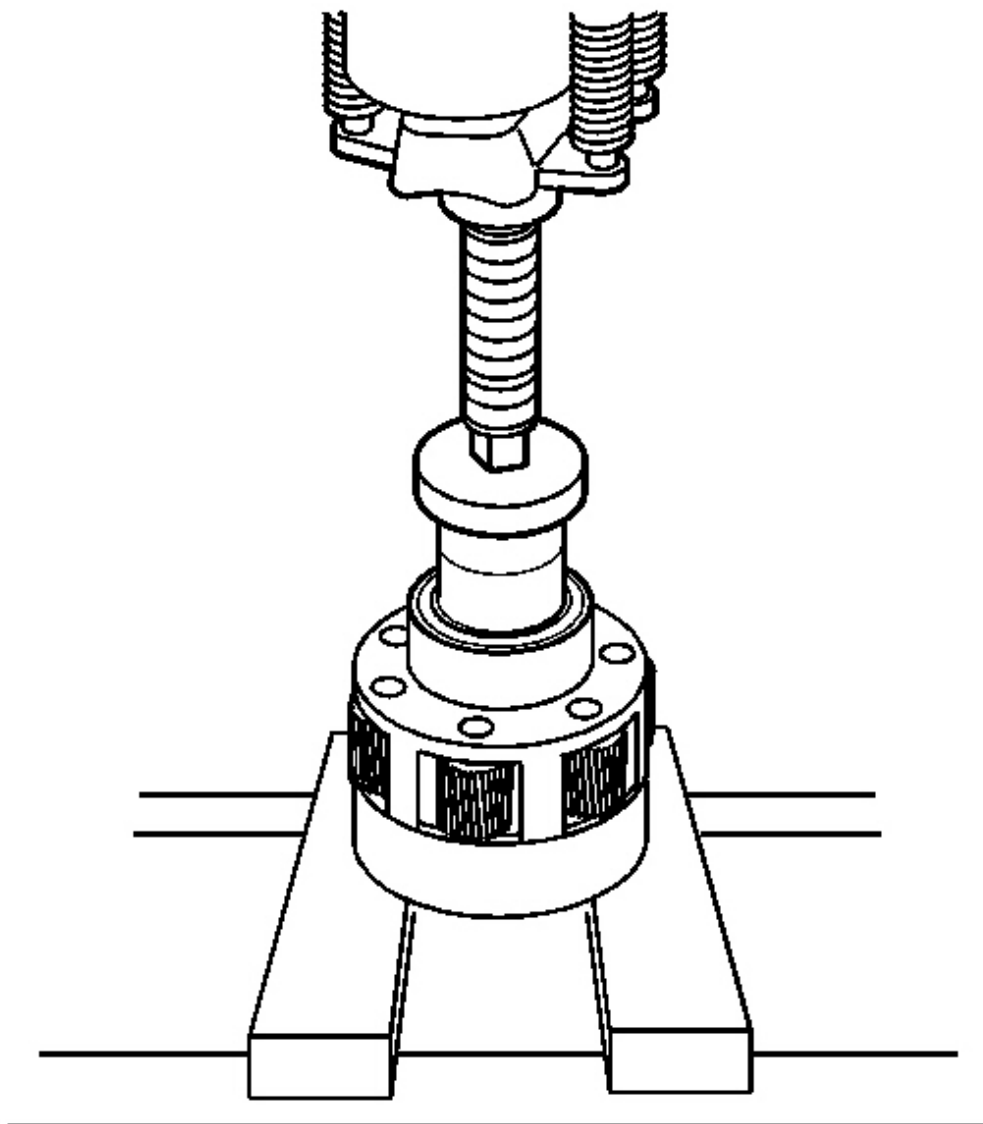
Locating Rear Output Shaft Rear Thrust Washer
